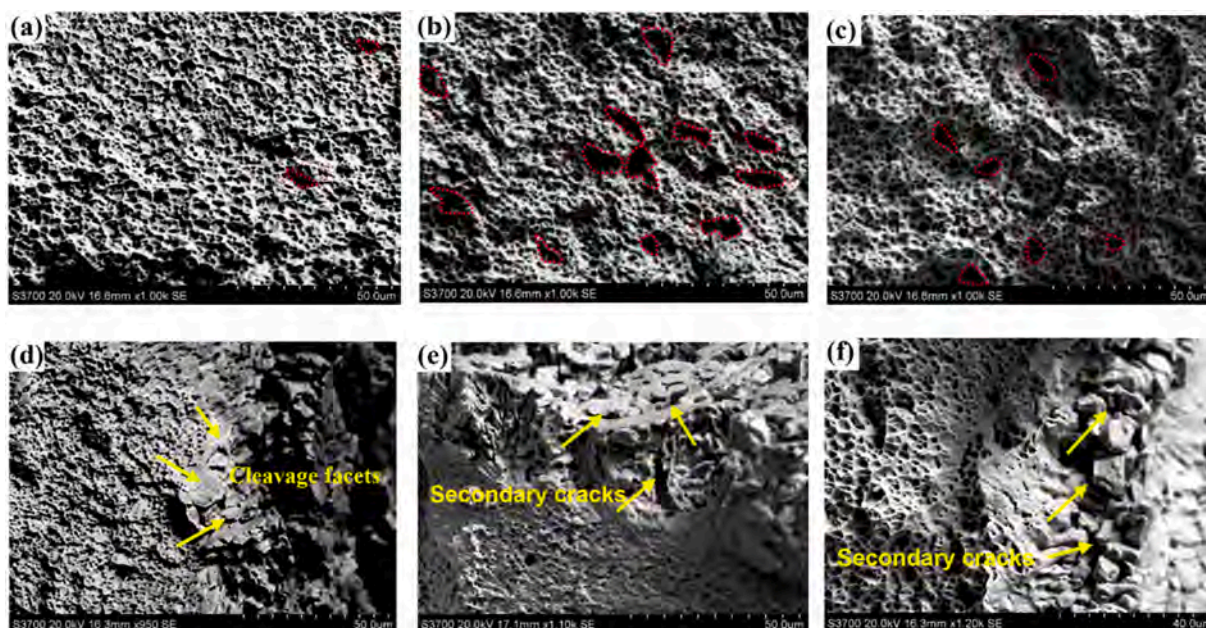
SEM micrographs of hydrogen-charged specimens: (a) Fracture center in M1, (b) Fracture center in M2, (c) Fracture center in M3, (d) Fracture edge in M1, (e) Fracture edge in M2, (f) Fracture edge in M3.
